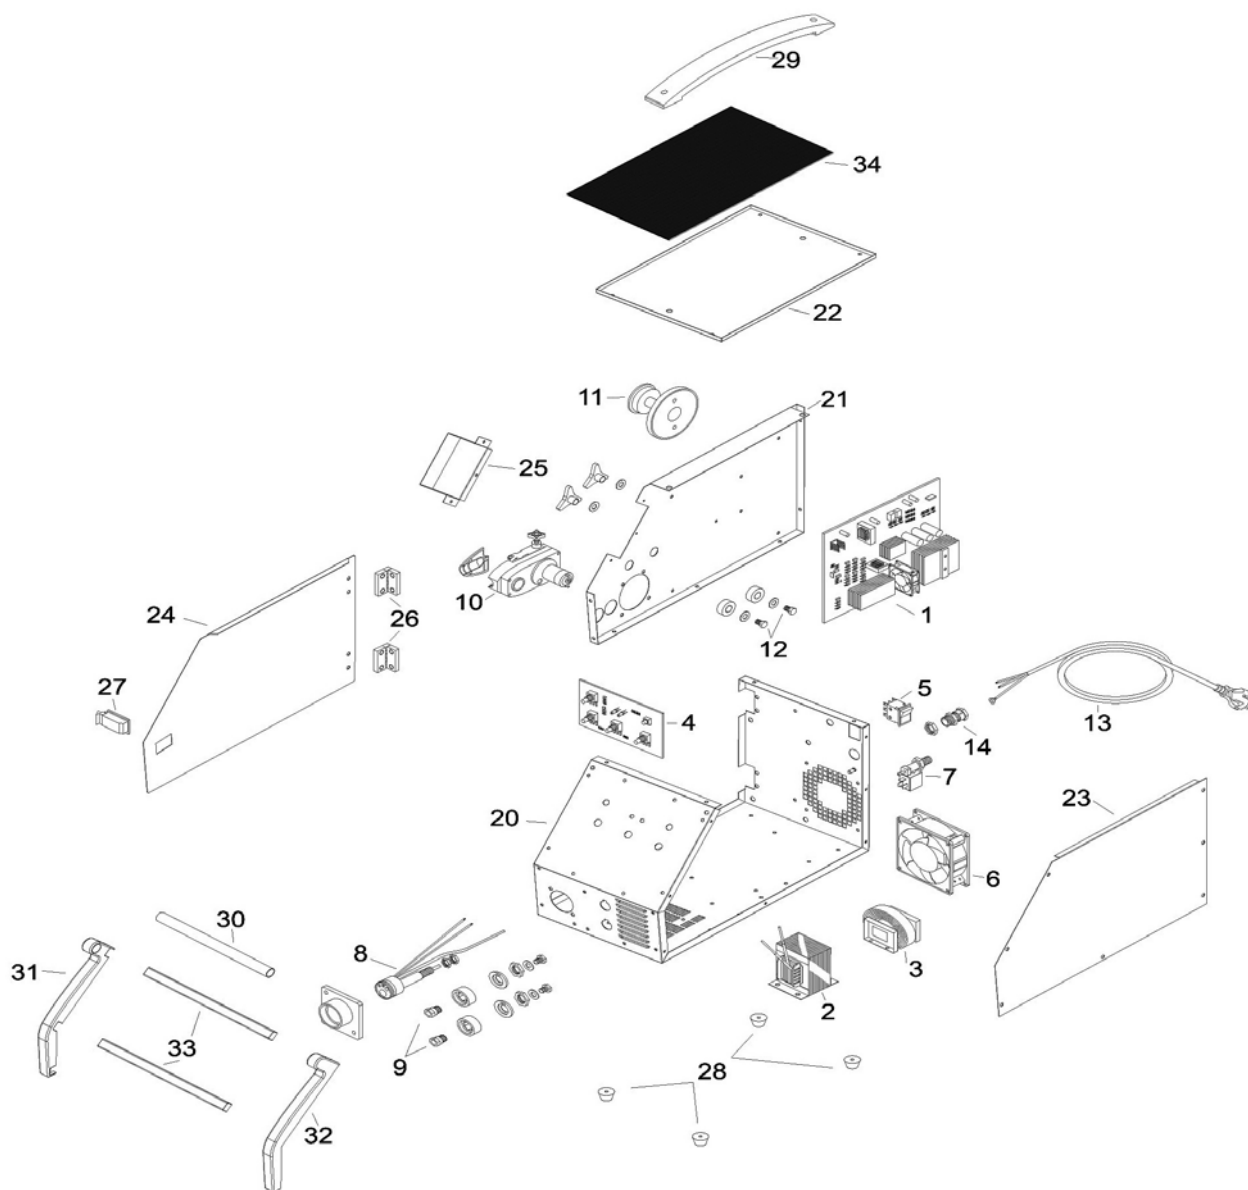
Spare parts drawing EASY-MIG 201i MULTI
